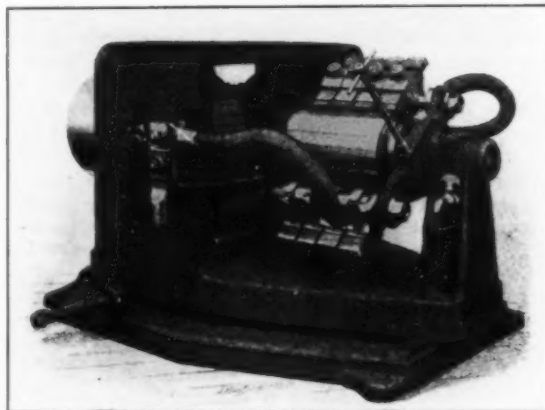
BIPOLAR ELECTROPLATING MACHINE.
